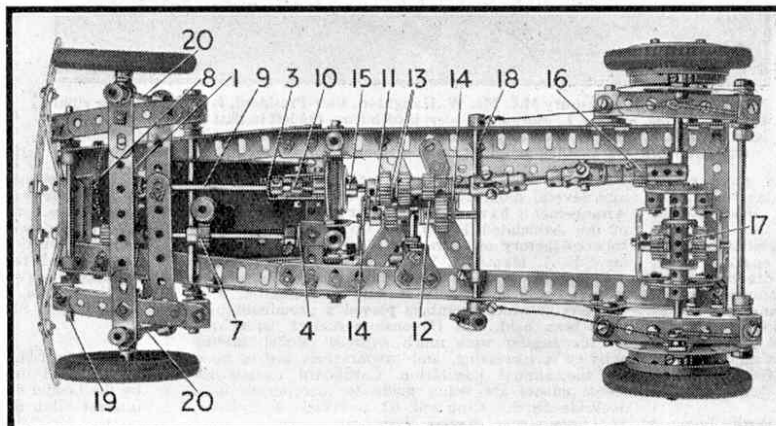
An underneath view of the chassis, showing the clutch, gear-box, differential and springs.
